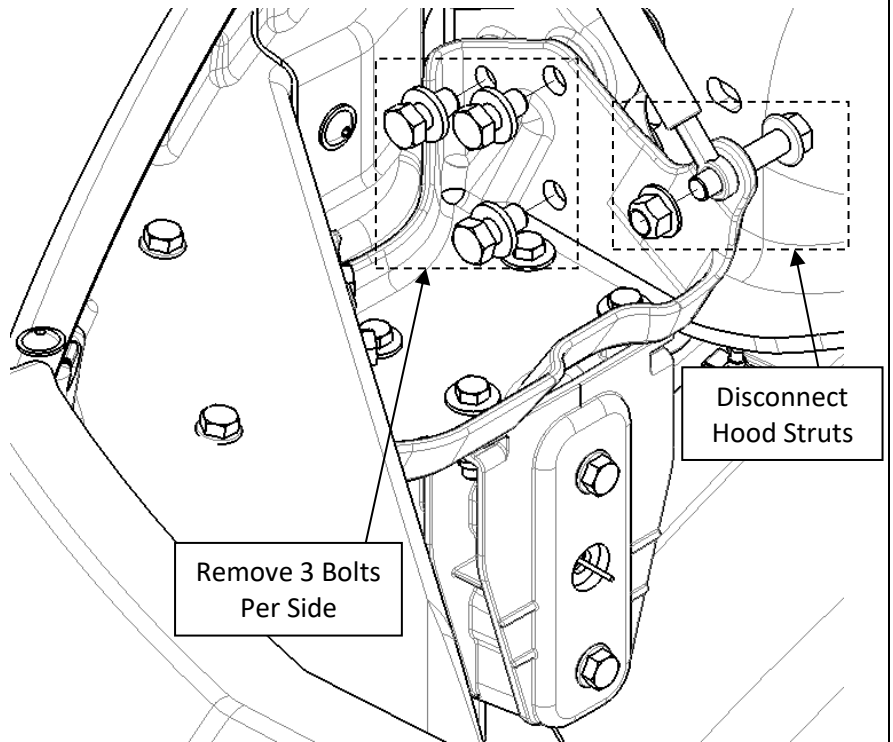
Factory Bumper Mounting Bracket Removal (Driver Side Shown).
